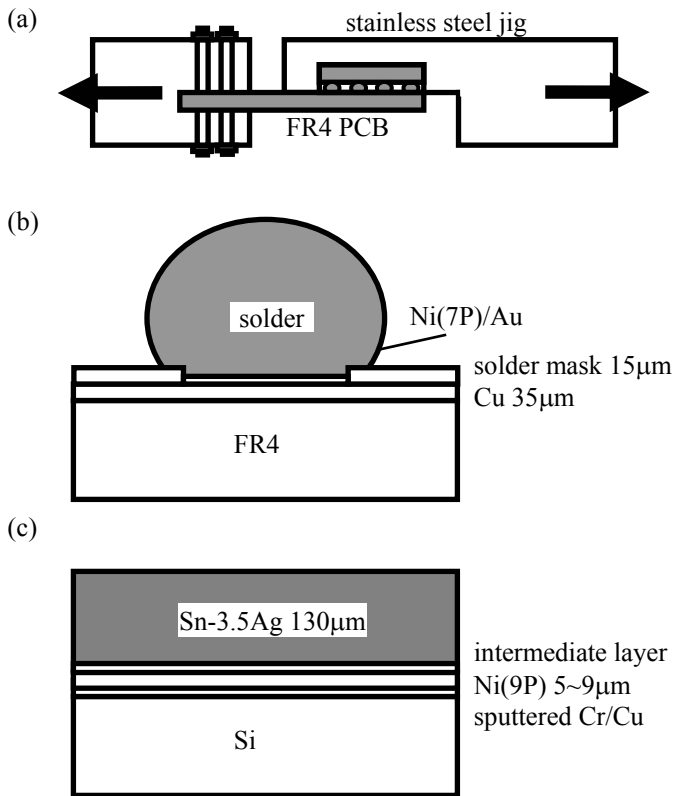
Schematic diagrams showing (a) a shear-test specimen held in stainless steel jig, (b) a solder pad in the shear-test specimen, and (c) a specimen for the reaction study with intermediate layers.
